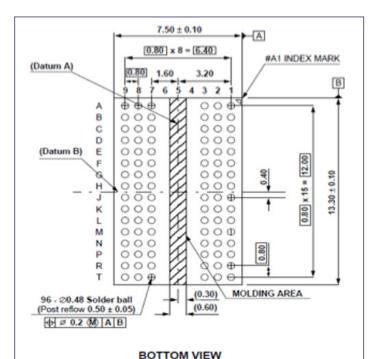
Package Footprint on Test Vehicle 1 (units in mm)
